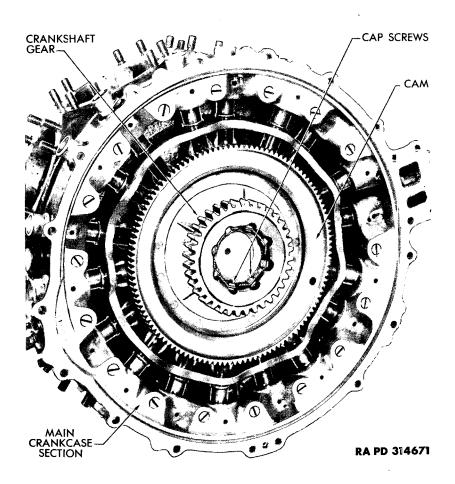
Main Crankcase Section before Removal of Crankshaft Gear
